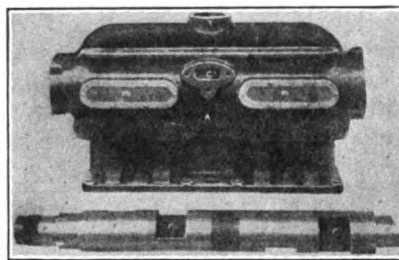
SHOWING CYLINDER CASTING AND SLEEVE OR DISTRIBUTOR
